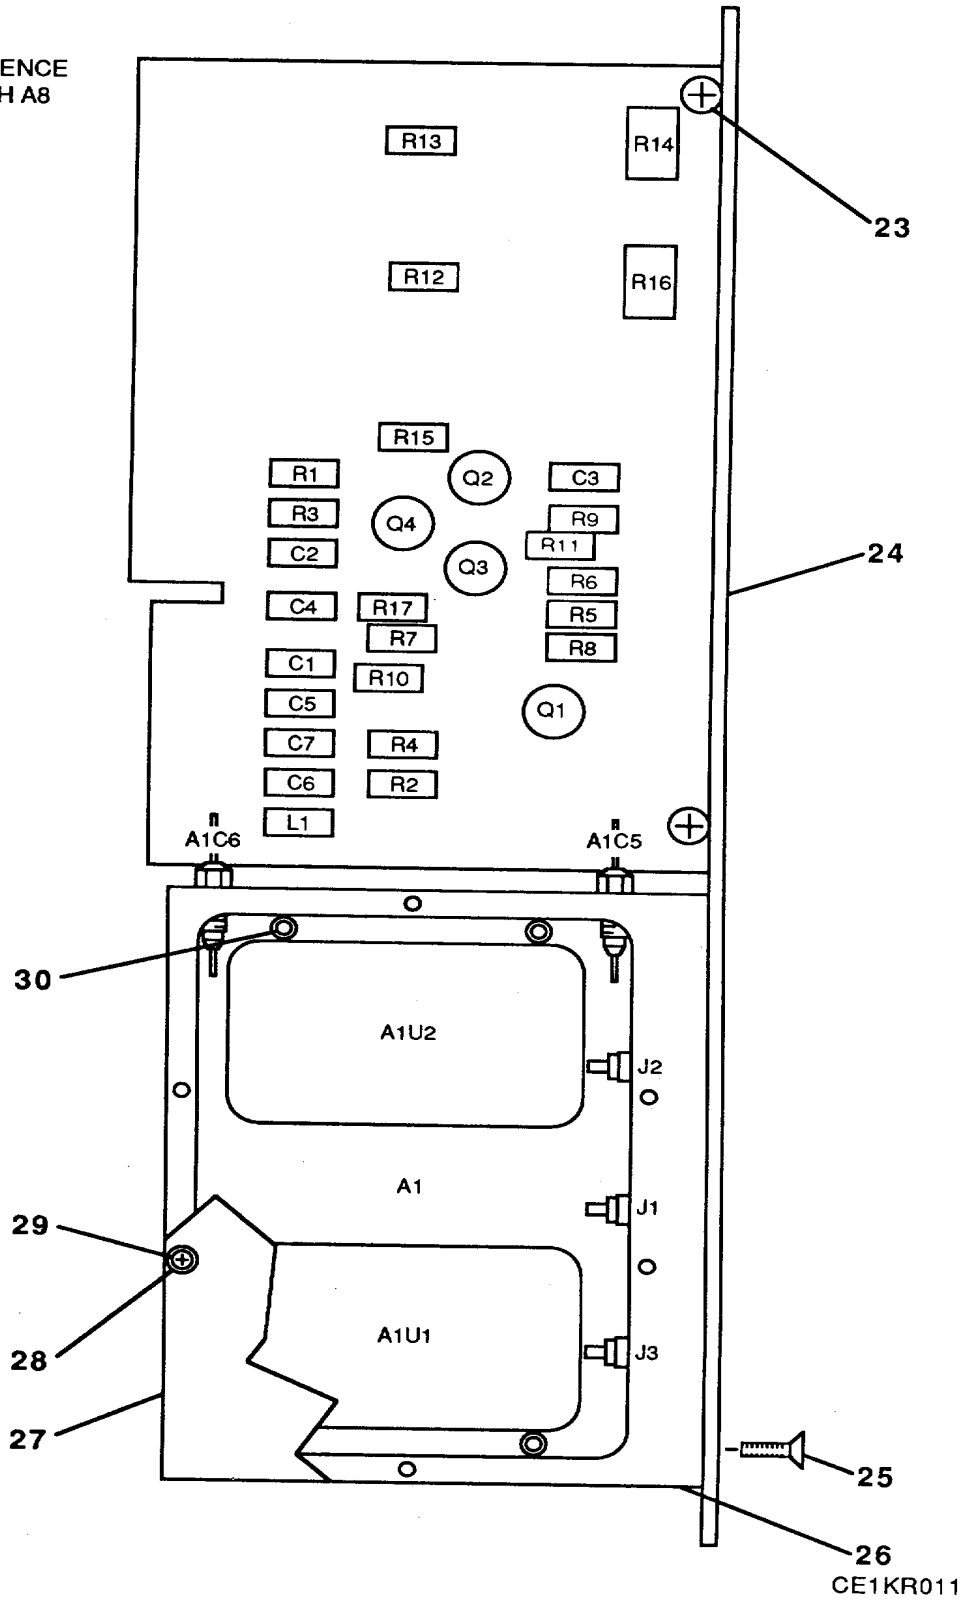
Video ALC Amplifier Circuit Card Assembly (Sheet 1 of 2).
